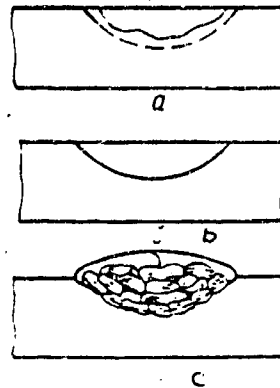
Welding of Pits: a- flaw (defect); b- trimmed-out cavity; and c- welding.
